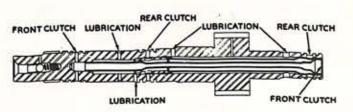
Lubrication and Fluid Passages of Primary Sun Gear Shaft.
